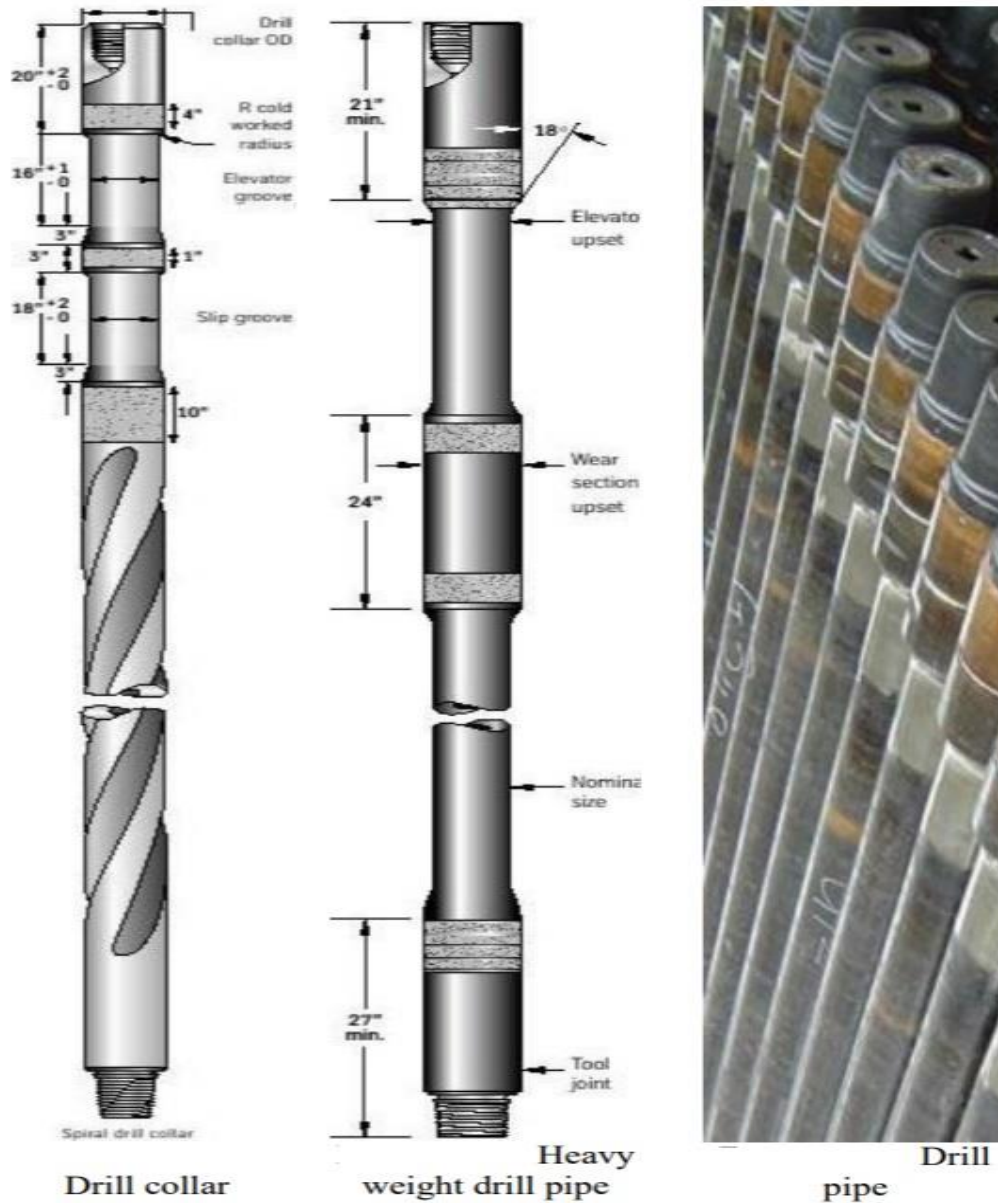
Drill collars and drill pipes (K.Ngugi., 2008).
